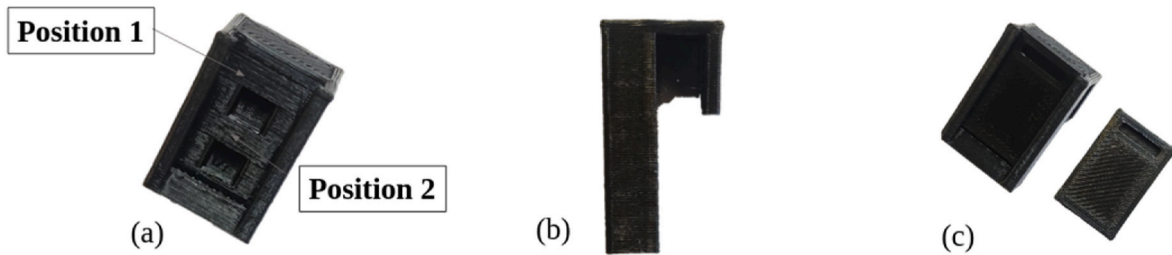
Views of the dosimeter holder: (a) Upper view, (b) Side view and (c) Dosimeter holder + sup-on lid.
